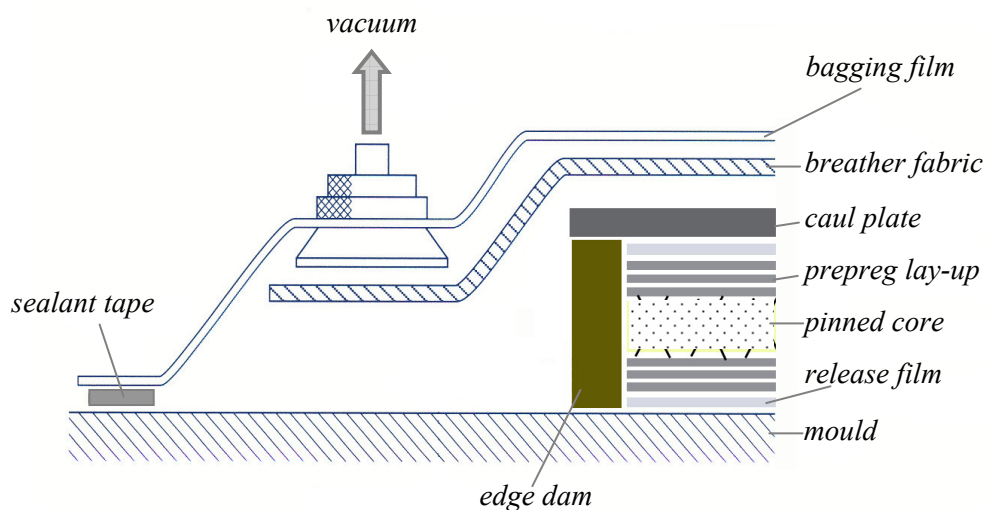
Typical X-Cor bagging assembly schematic for a co-curing process
